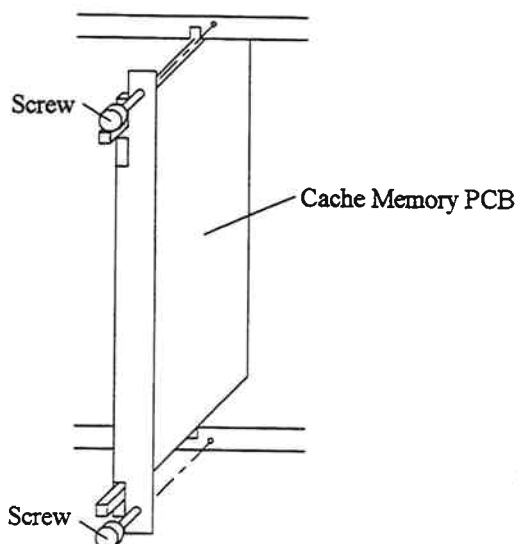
Removal of the Cache Memory PCB
